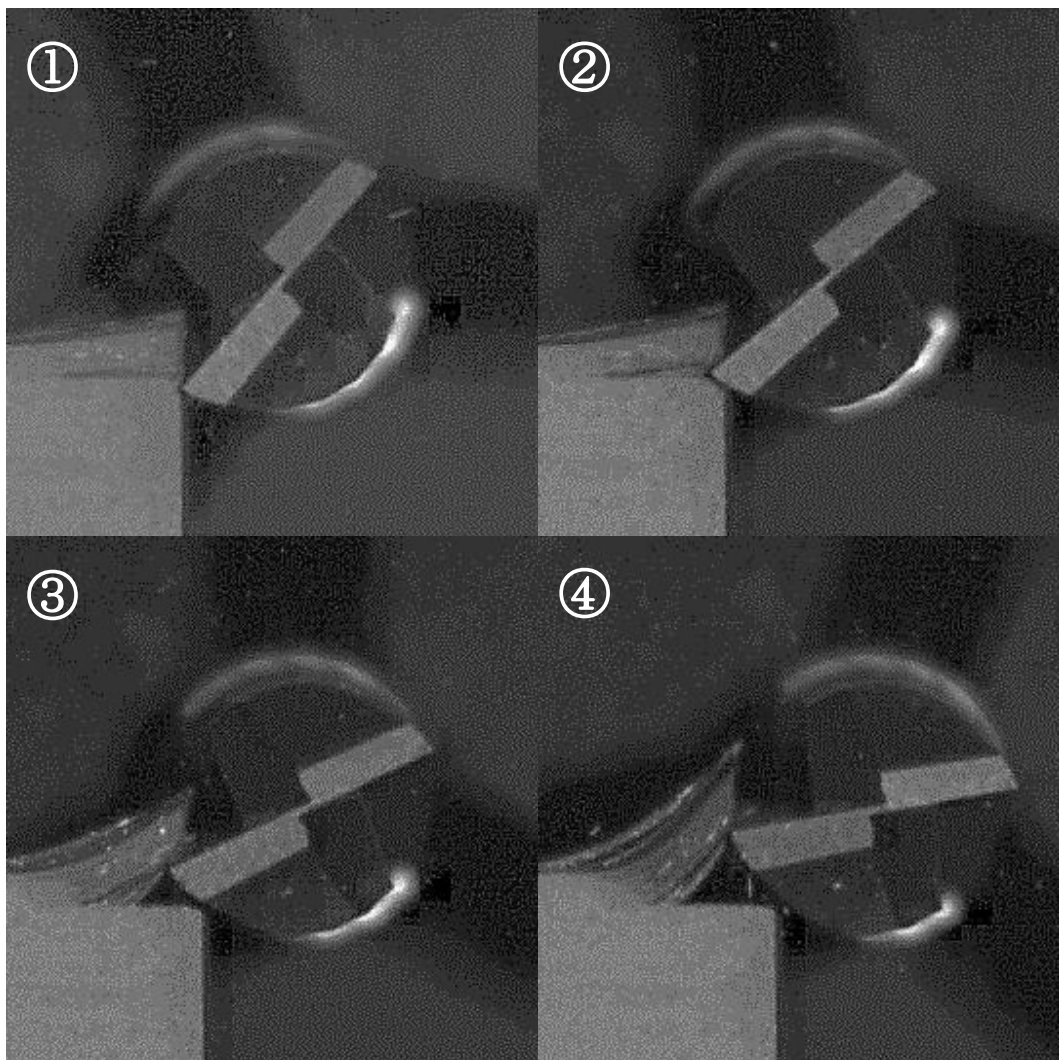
Frame-by-frame photo of CFRP milling of bottom angle view (Material A:  $0^\circ$ , Tool No.1: Helix angle  $0^\circ$ ) (Up cut method)
